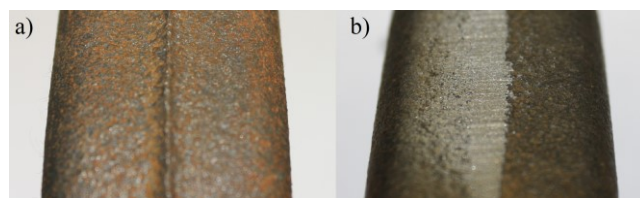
Castings a) before and b) after deflashing with an abrasive waterjet machine
